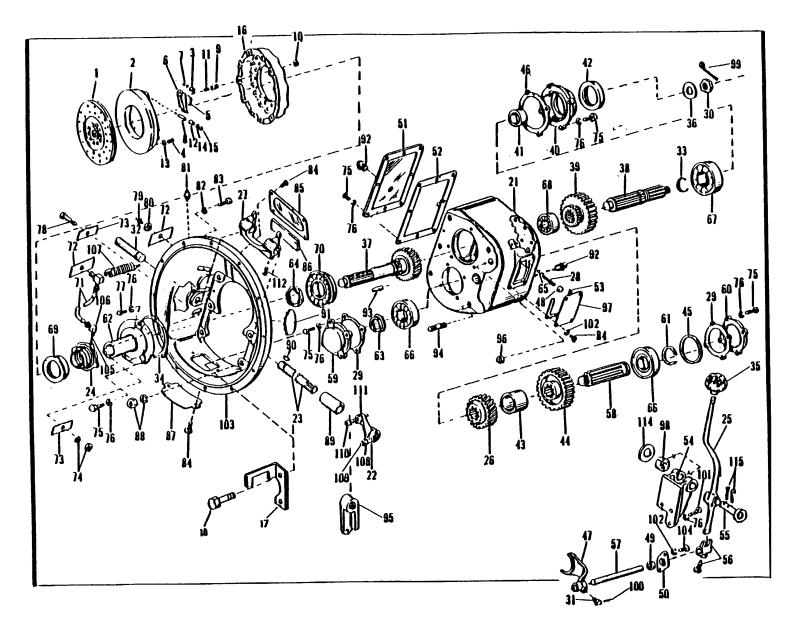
TWO SPEED TRANSMISSION - ROTOR DRIVE
